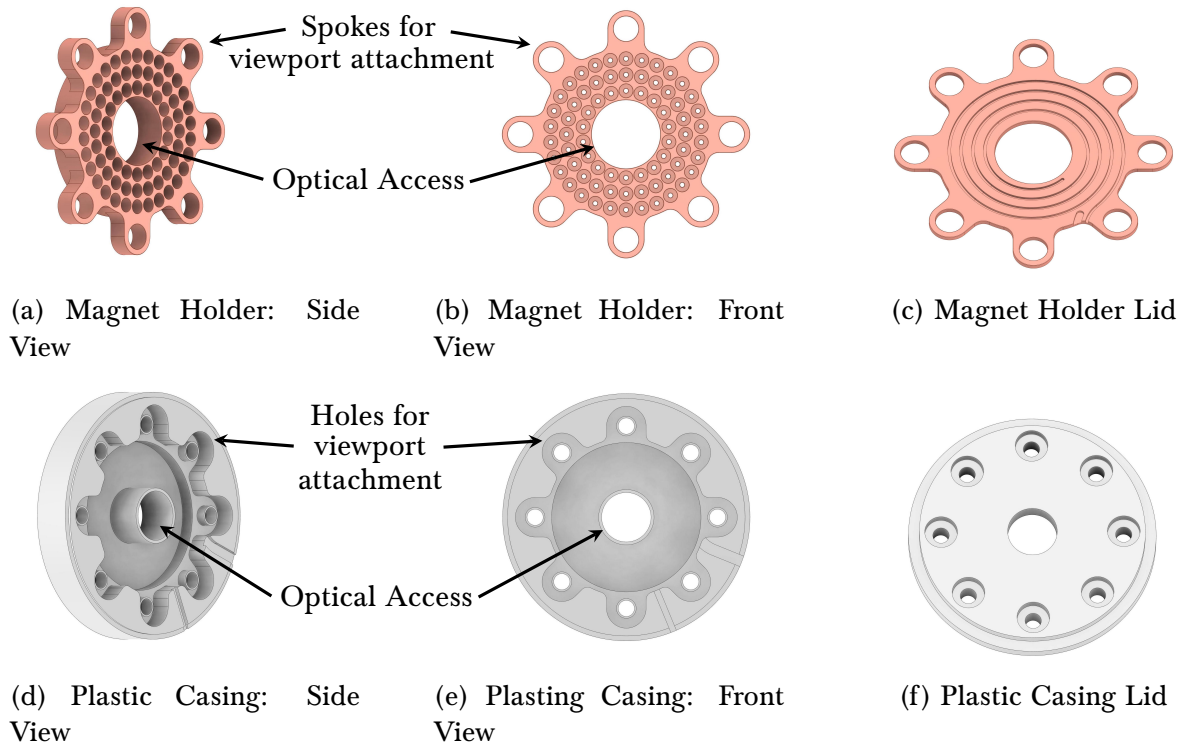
Copper magnet holders and plastic housing. a) & b) Copper Magnet Holders. Each copper holder contains 72 cylindrical holes of dimension 6 mm x 10 mm to hold the magnets. They are arranged in three concentric rings of radius 33 mm, 26 mm, and 19 mm. The samarium cobalt magnets fit in these cylindrical holes, designed so that the magnets sit flush against the walls and so are held in by friction. At the back of each of these cylindrical holes is a small opening, visible in Figure b), which allows the magnets to be pushed out when removal is necessary. c) Lid to the magnet holders. A spiral groove in the lid allows the inclusion of a heating wire if necessary. d) & e) Plastic Housing. The magnet holders are in turn housed in a plastic casing. f) Lid to the plastic holders. The holes allow the entire fixture to be attached to the screws of the South and North viewports of the vacuum chamber.
